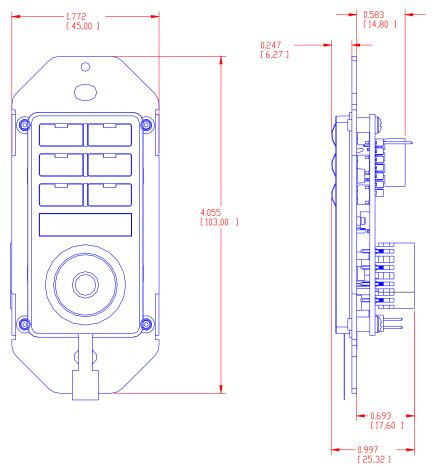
MET-6N and DAS-MET-6SRC Mounting Dimensions
